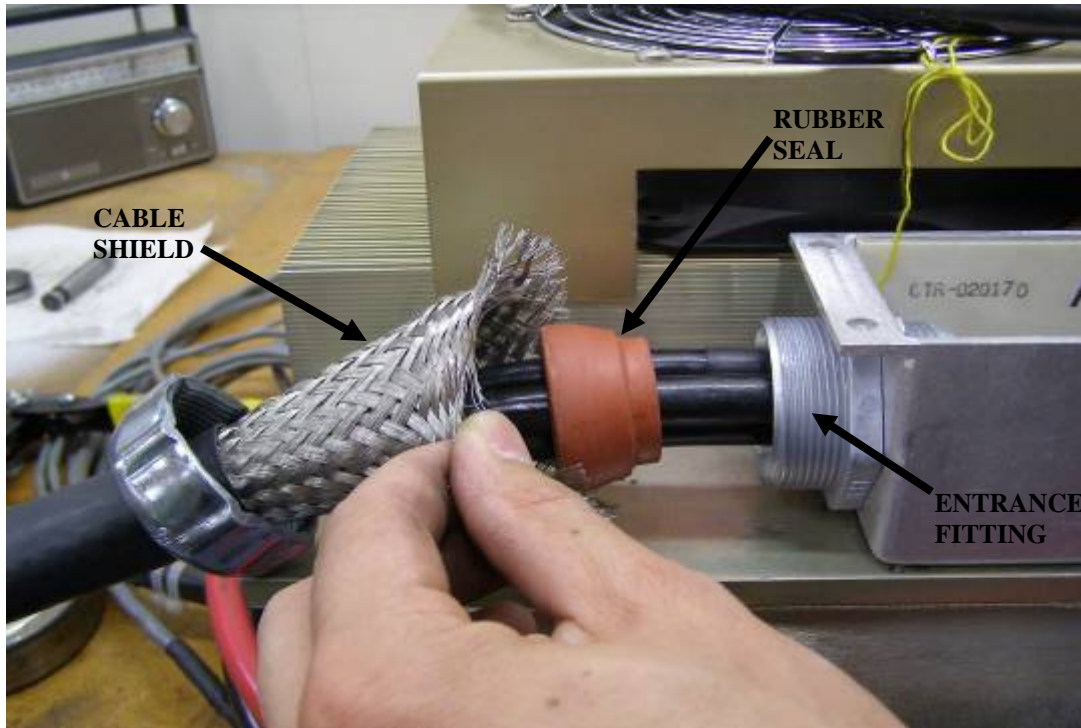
Shielded AC motor cable connection at DMOC terminal box.
